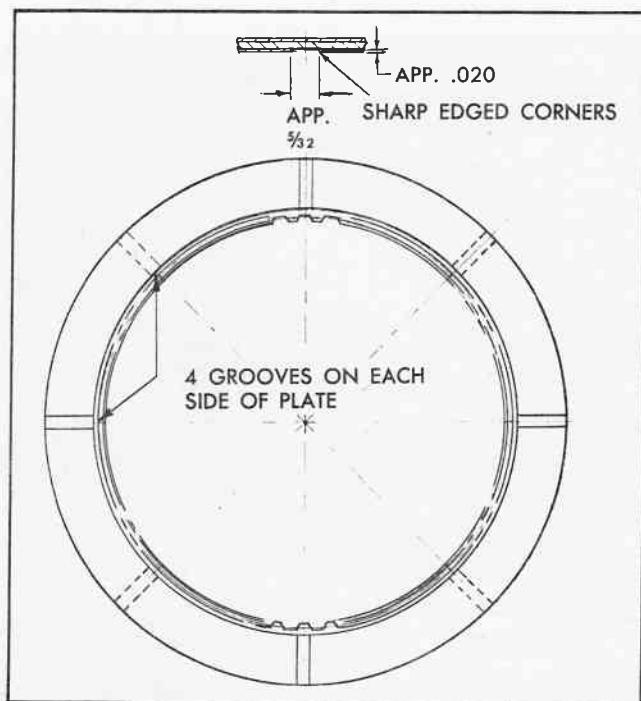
Location of Grooves in Neutral Clutch Drive Plates
